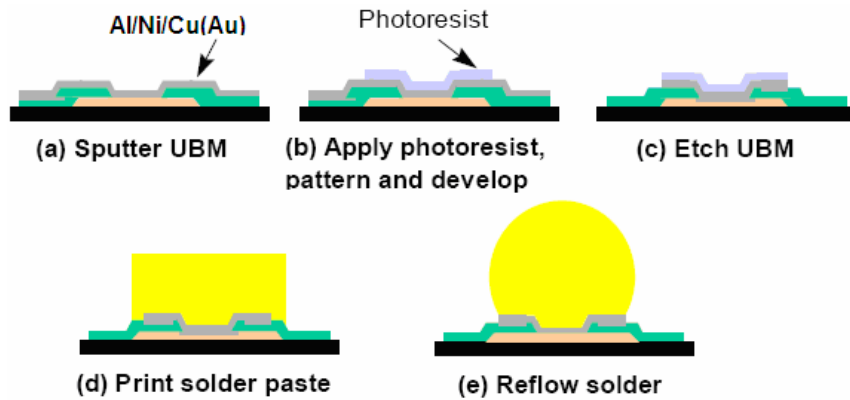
Sputtered UBM and Printed Solder Paste Bumping [18]
